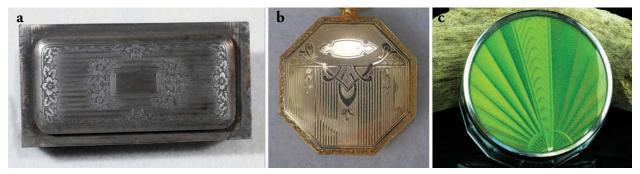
Press tool with engine turning (Courtesy of Brittany N. Cox); 11b. Clad metal watchcase with engine turned pressing (Courtesy of Brittany N. Cox); 11c. Celluloid and metal engine turned compact case (Courtesy of Steve White)
